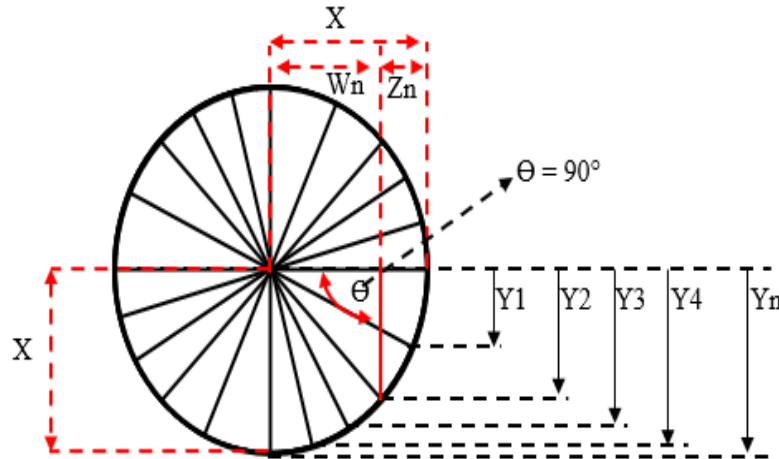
Tolerance analysis of deformation distance of E-Bhar machine FFB catcher components
